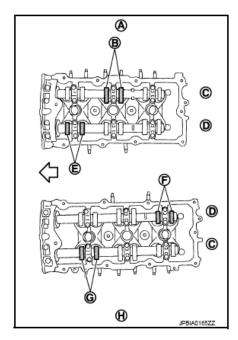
Measuring Clearance Between Valve Lifter And Camshaft Using Feeler Gauge Courtesy of NISSAN NORTH AMERICA, INC.
